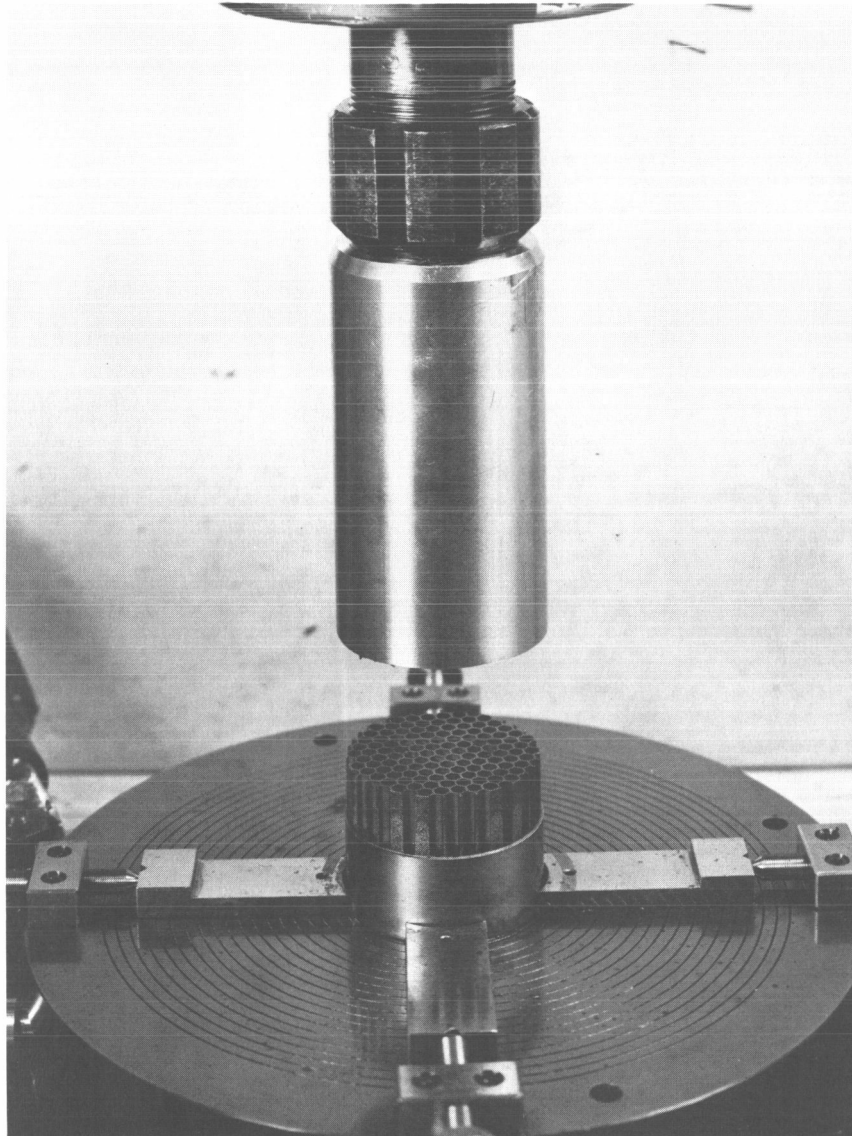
ELECTRIC DISCHARGE MACHINE. (Side View)
